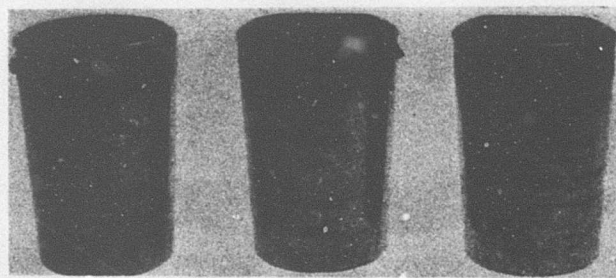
HM926700-Series Bearing After Test, Bearing No. 6, Test No. 13--Damaged After Running for 13 Hours at 11,500 rpm With Various Bearing End-Play Adjustments.
